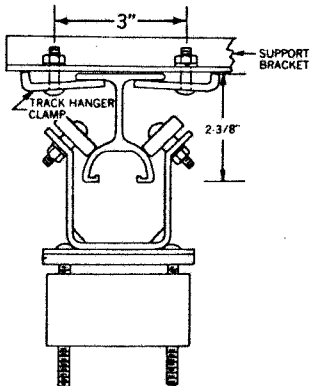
DETAIL TRACK HANGER CLAMP ASSEMBLY
